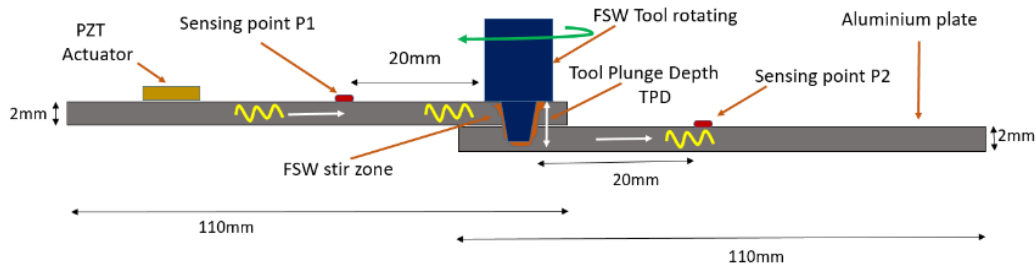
FSW specimen showing tool plunge depth (TPD), PZT actuator, sensing points P1, P2.
